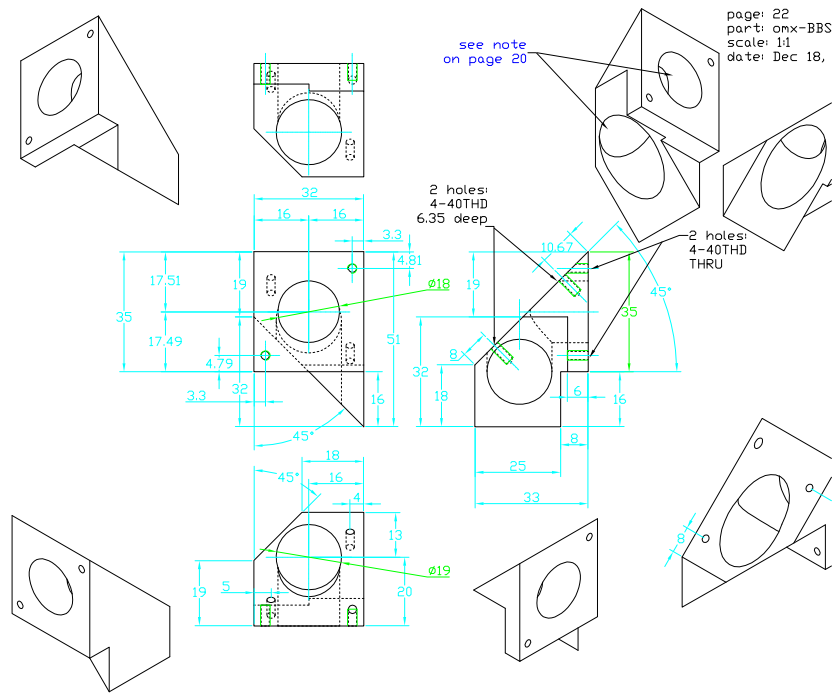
As an example the technical drawing of one of the beam-splitter holders is shown. To be able to machine the part it is required that all distances and sizes are carefully “dimensioned”. Edges that would be obscured have to be drawn as dashed lines by convention. Every screw hole needs careful specifications. The original drawing was printed slightly bigger at the exact scale of 1:1 – all units are given in mm.
